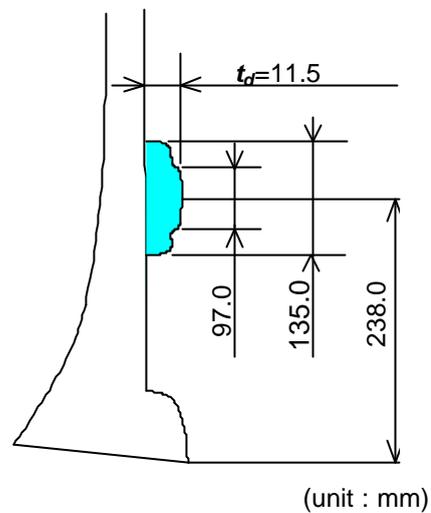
A sectional shape and the dimensions of Hojobo's Doza
